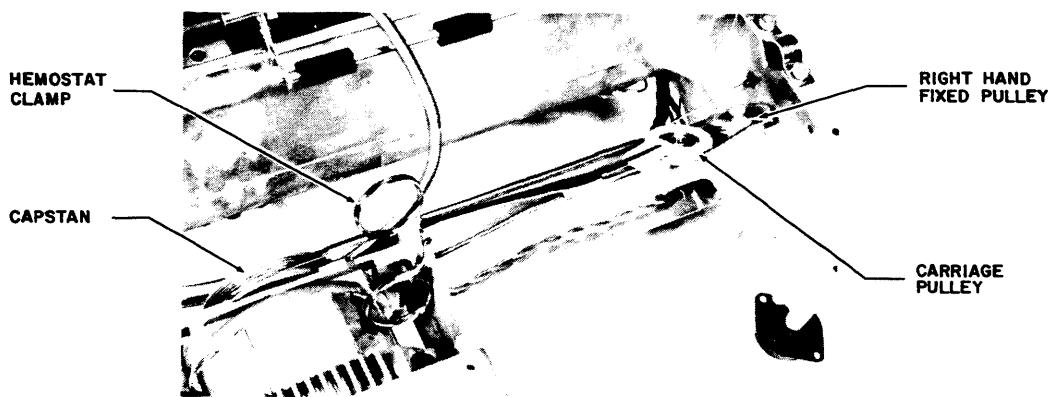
Right-Hand Carriage Drive Cable Installation
